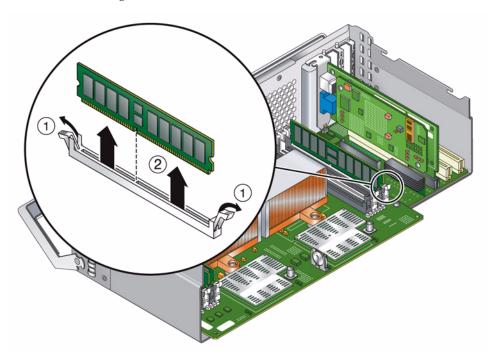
Removing DIMMs on the CPU Board (X4540 shown)
